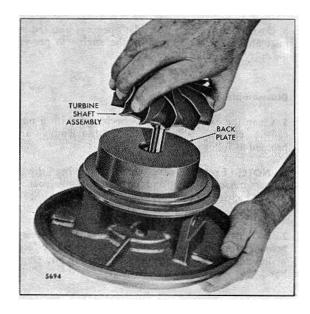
Removing Turbine Shaft Assembly and Backplate from Bearing Housing
